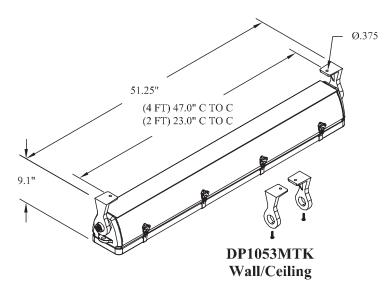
DP1053MTK Wall/Ceiling Mount Installation
